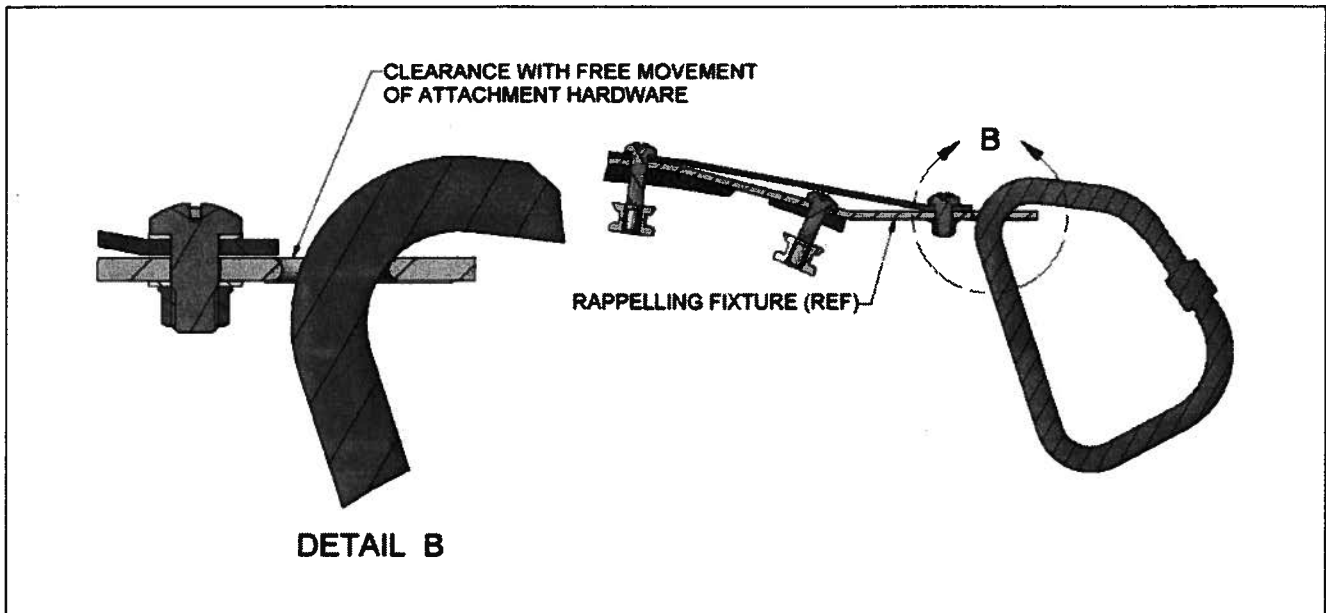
ACCEPTABLE RAPPELLING FIXTURE LOAD ATTACHMENT
